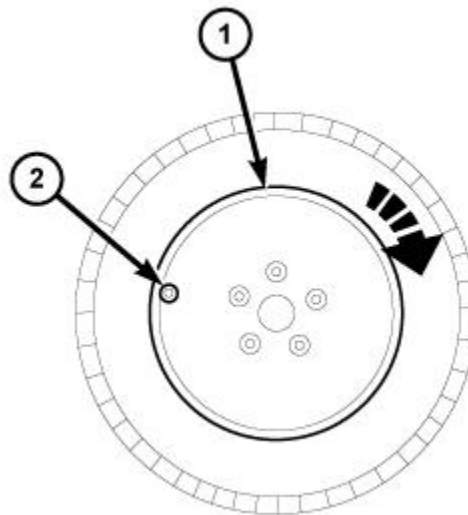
Mounting Tire Using Rotating Wheel Machine
